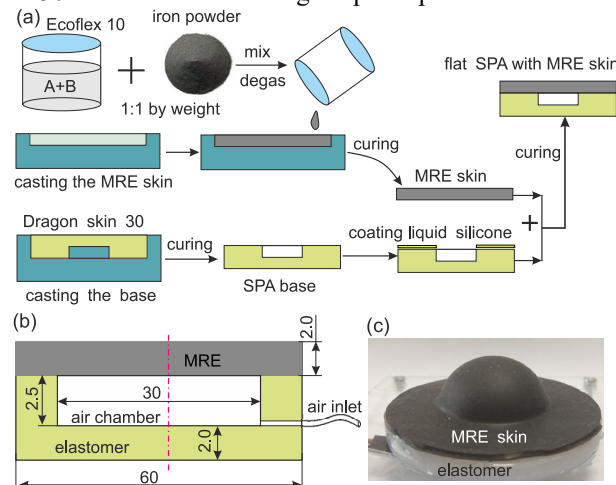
(a) Fabrication procedure for the SPA with MRE skin; (b) Dimension of the SPA design (units in mm); (c) A photograph of the pressurized SPA.
